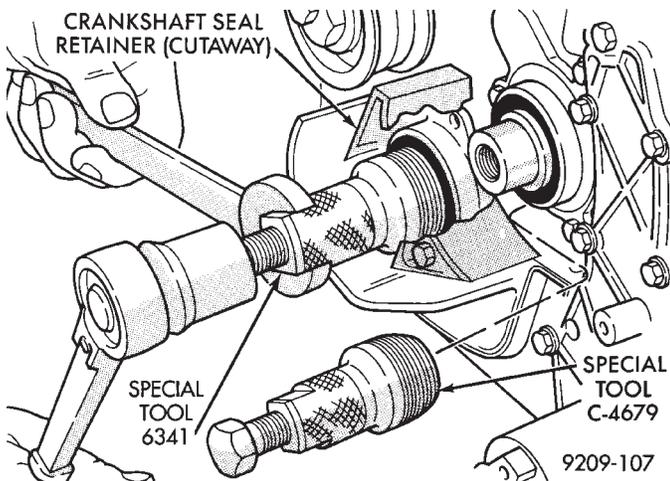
Removing Crankshaft, Intermediate Shaft and Camshaft Oil Seal
